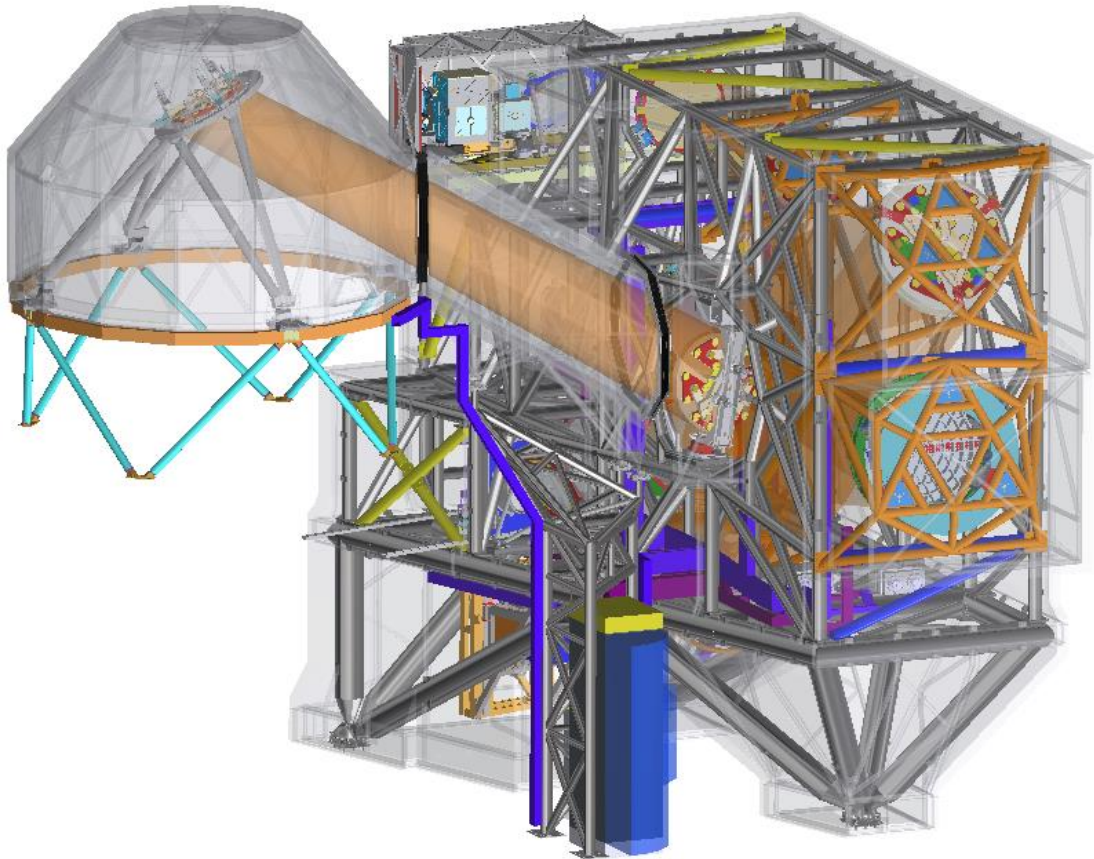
3D CAD model assembly of MORFEO Main Structure.
